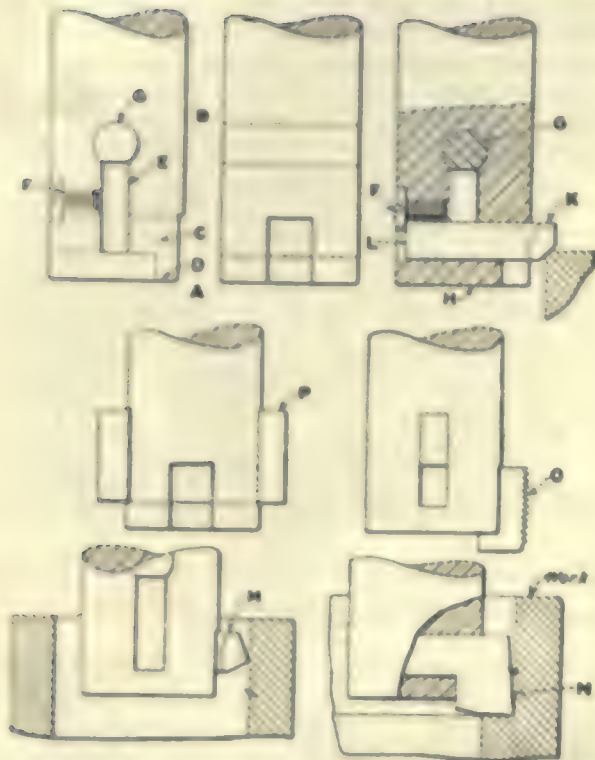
TYPE OF BORING BAR USED ON VERTICAL TURRET LATHE
